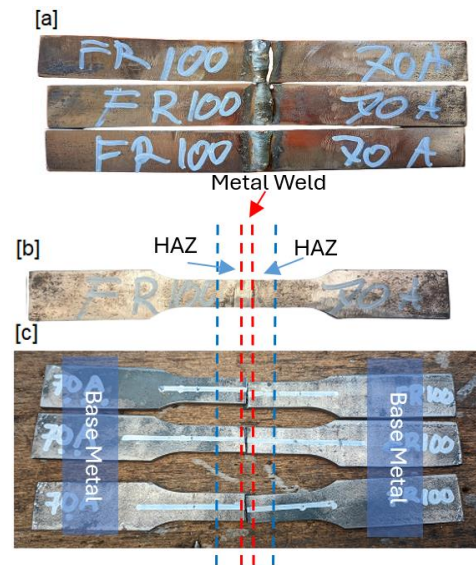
Test Specimens(a) Welding Results, (b) Preparation Tensile test, (c) Test specimen results from tensile test
